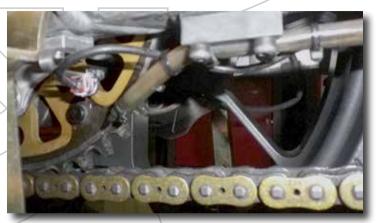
Mounting under the swing arm. Nozzle to the outer face of the sprocket.
